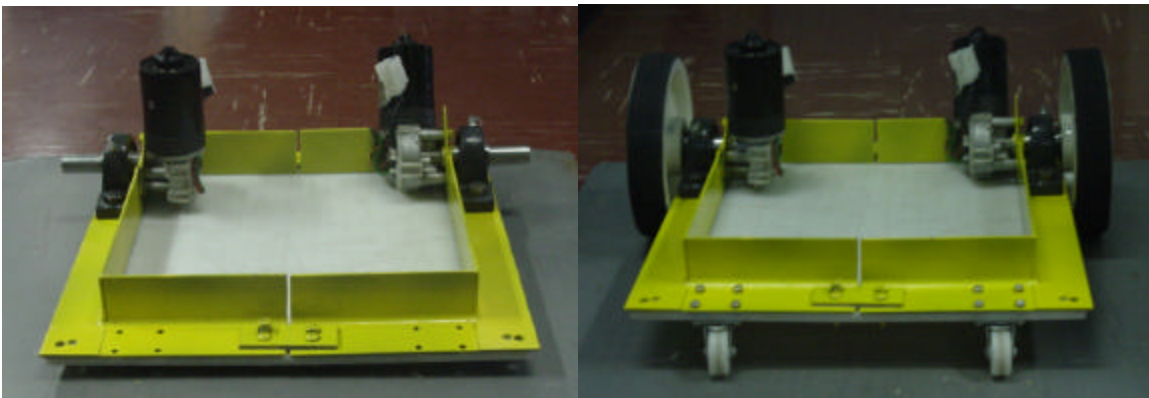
PARTS OF THE CHASIS FRAME
